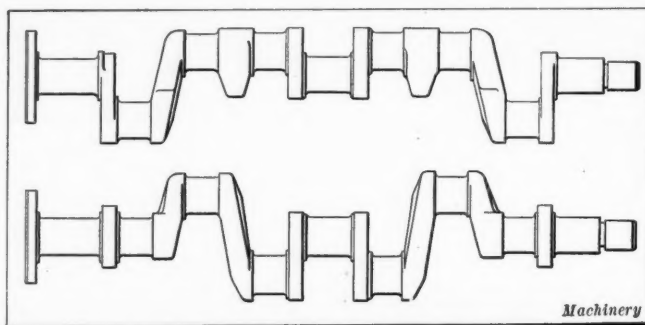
Two Types of Crankshafts that are advantageously handled on the Universal Machine
